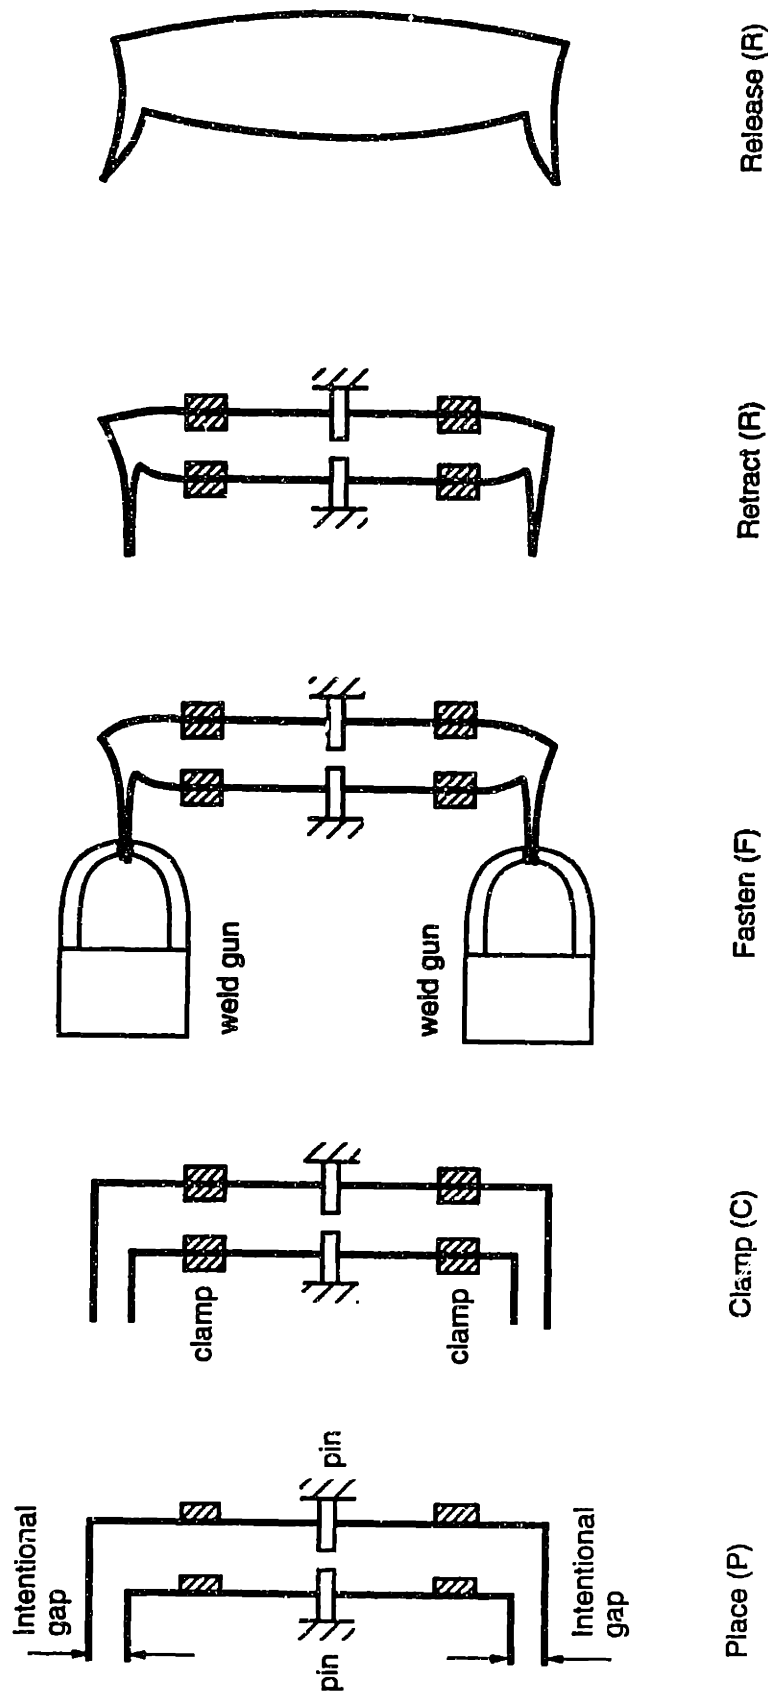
The PCFRR cycle for an assembly with intentional gaps between mating surfaces and parts with nominal geometry
